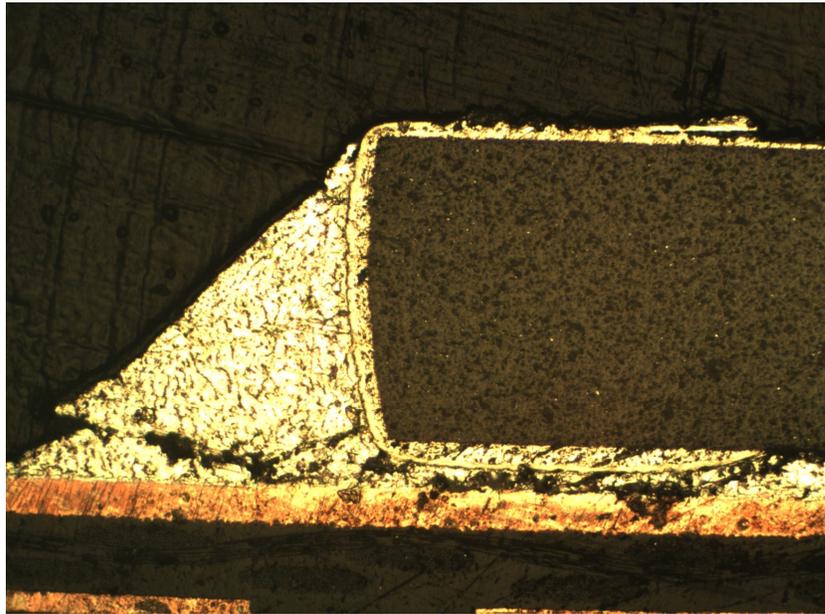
Hot Melt 2 on FLEX Test Board 2512 Resistor Image
